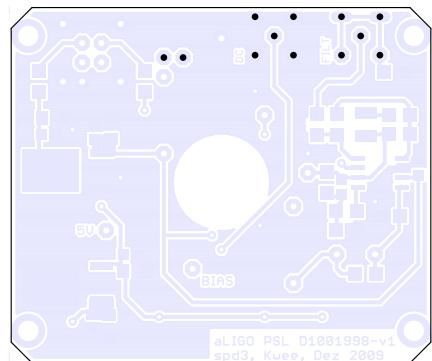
Board bottom view showing drills with 0.9 mm (0.035 in) diameter
